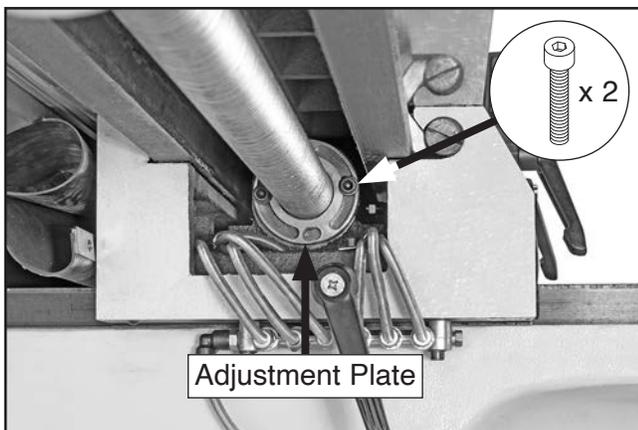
Location of X-axis leadscrew nut cap screws and adjustment plate.
